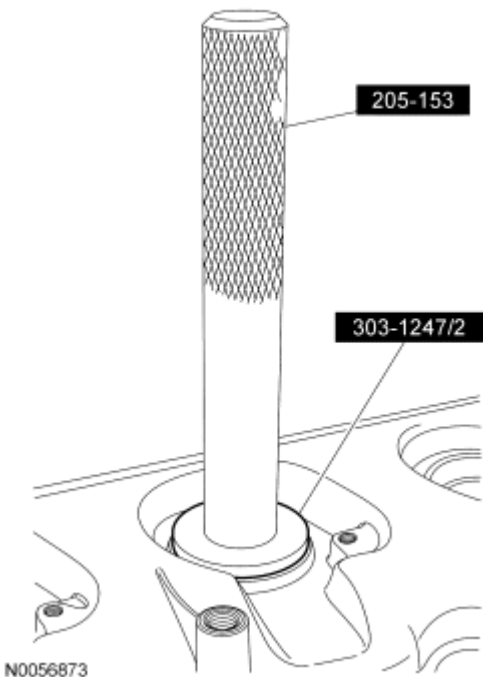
Installing VCT Solenoid And/Or Spark Plug Tube Seals Using Special Tools (205-153) & (303-1247/2)
